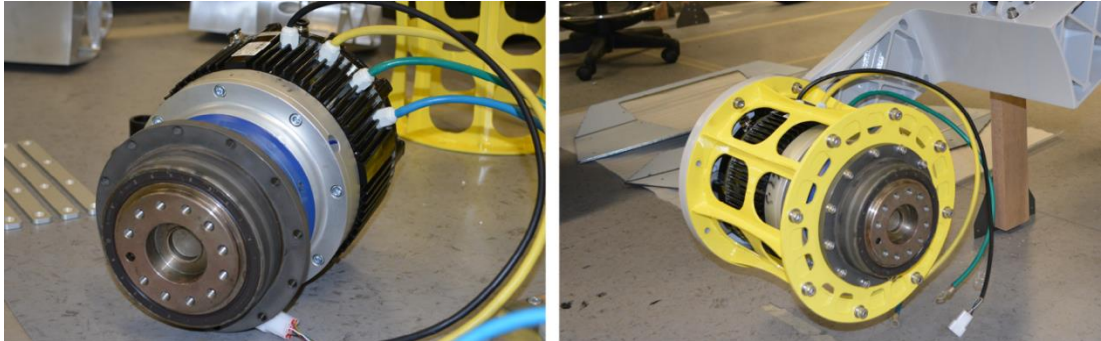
The following image in the complete drive unit before and after installation to the drive unit support cage.
